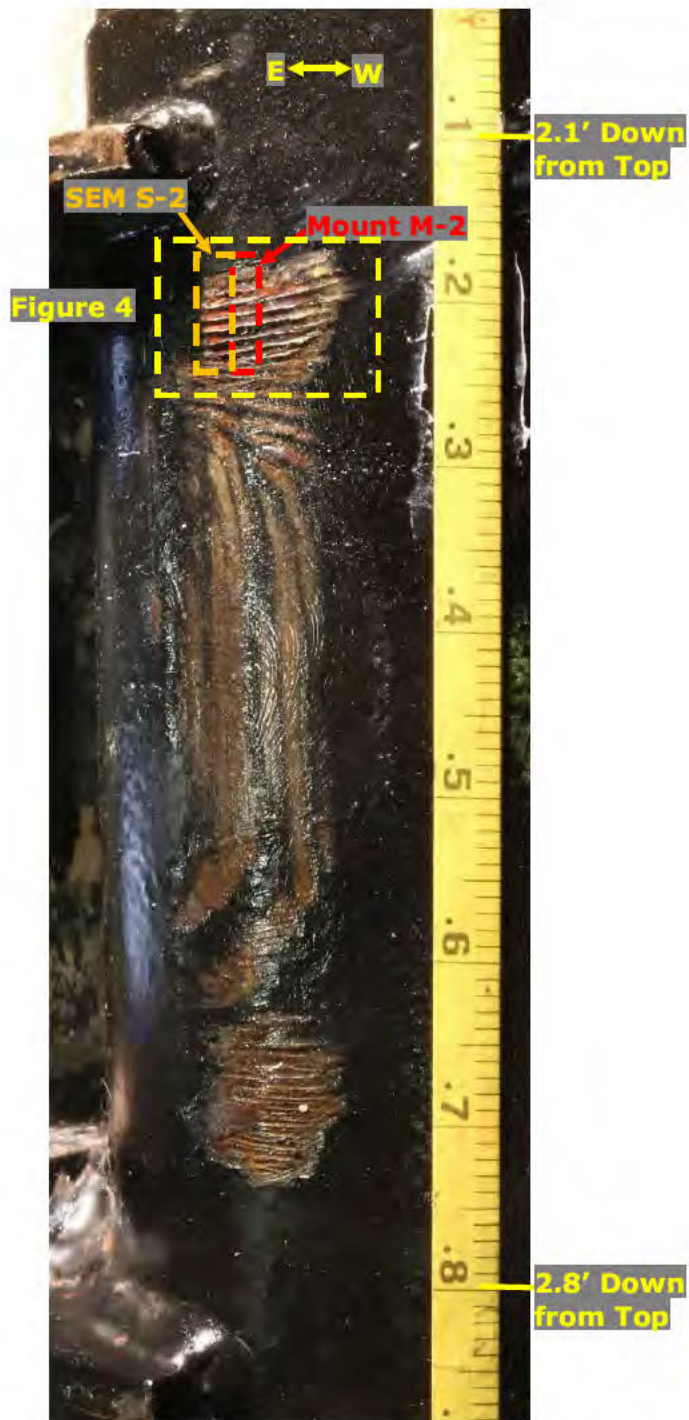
Photograph of Anomaly 2 located on OD surface of the West Sleeve Ring (North side of assembly), and locations of Mount M-2 and SEM-2. Location shown in Figure 1. Tape measure indicates distance down from top of assembly in feet.
